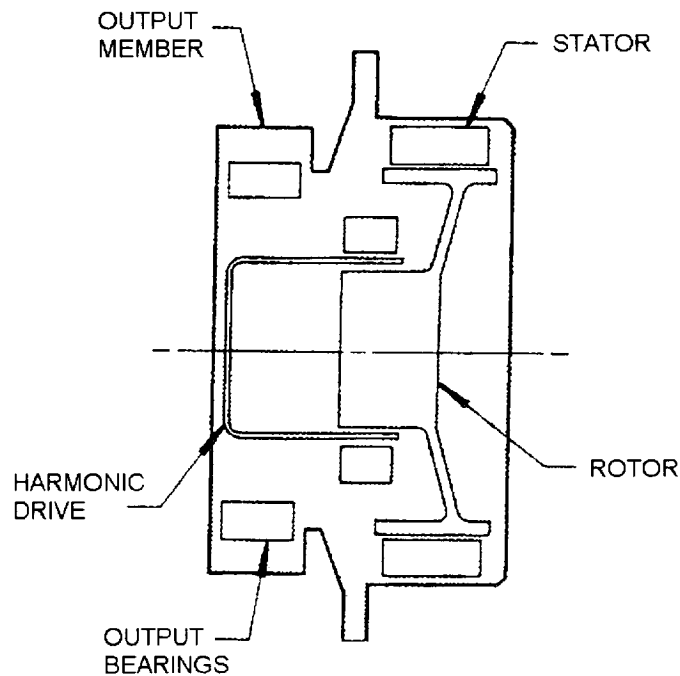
TYPE 2 STEPPER MOTOR CUT-AWAY VIEW
